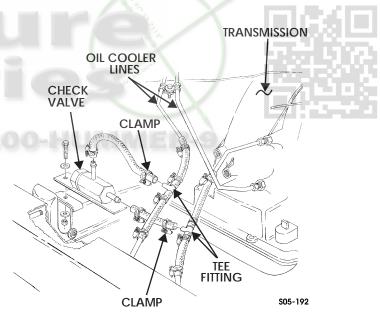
Check Valve And Transmission Oil Cooler Lines
